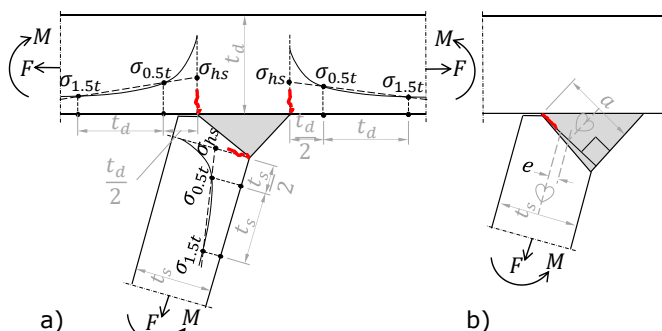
Stress parameters for the details at the stiffener-to-deck weld a) hot-spot stress b) weld throat stress.
